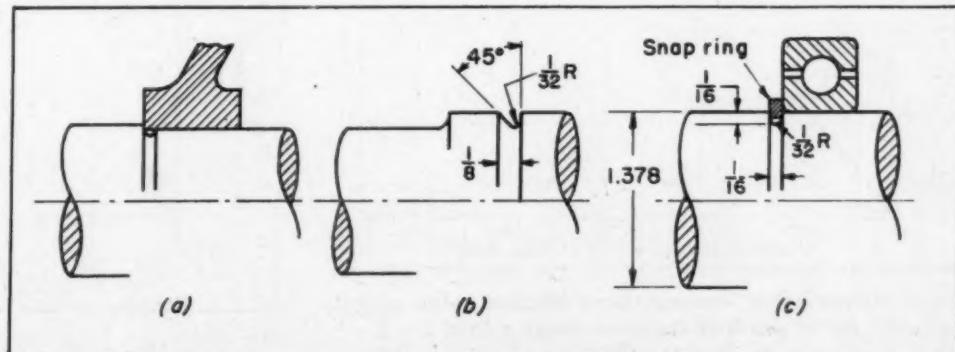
Examples of grooved shafts. A grinding relief groove is shown at (a), an oil slinger groove at (b), a snap ring groove at (c)
